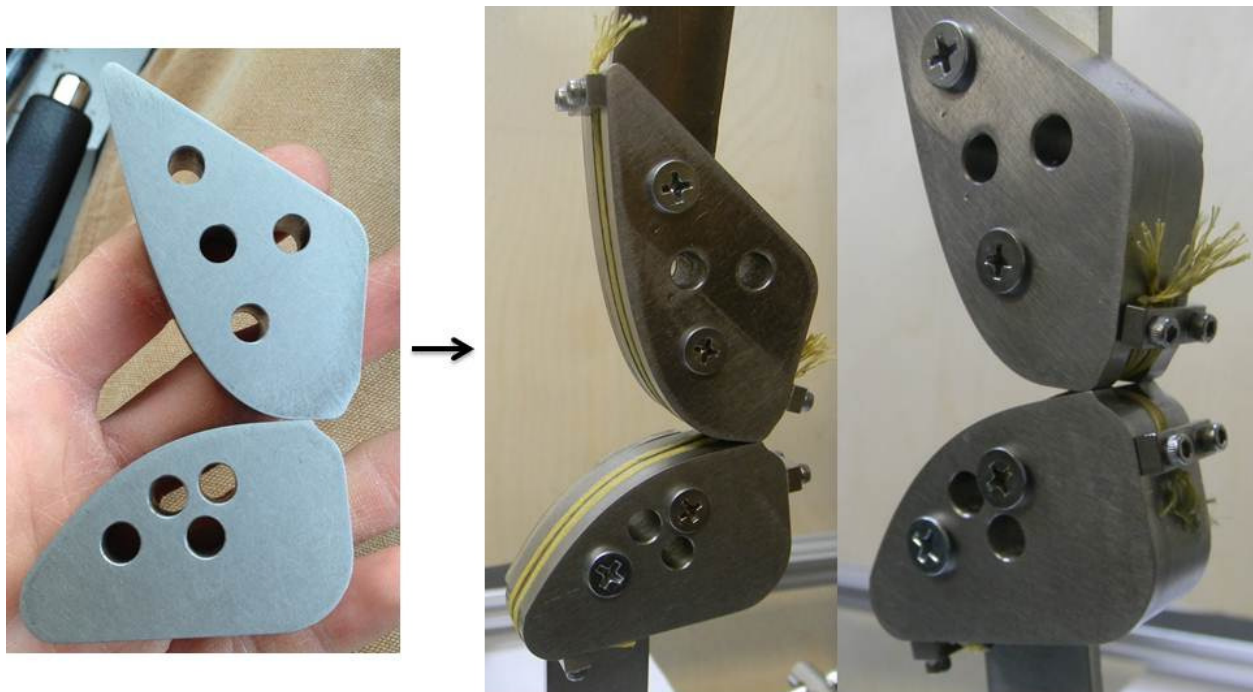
(a) Metal components manufactured by Hillside Engineering [44]; (b) posterior and anterior views of the joint assembled using Kevlar string.
